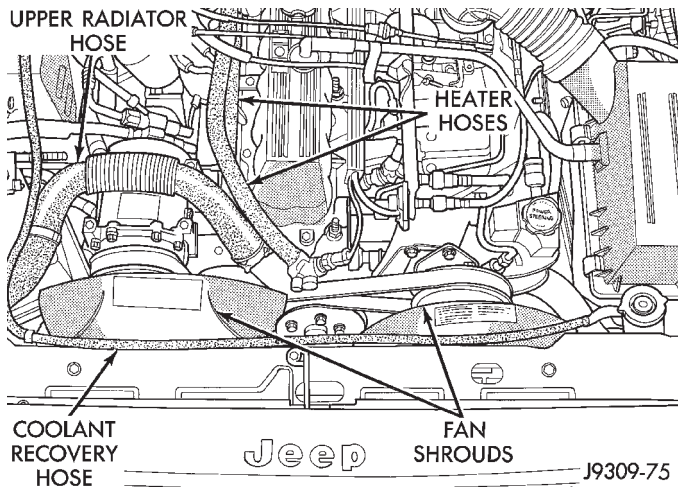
Upper Radiator Hose, Coolant Recovery Hose, Fan Shroud & Heater hoses
